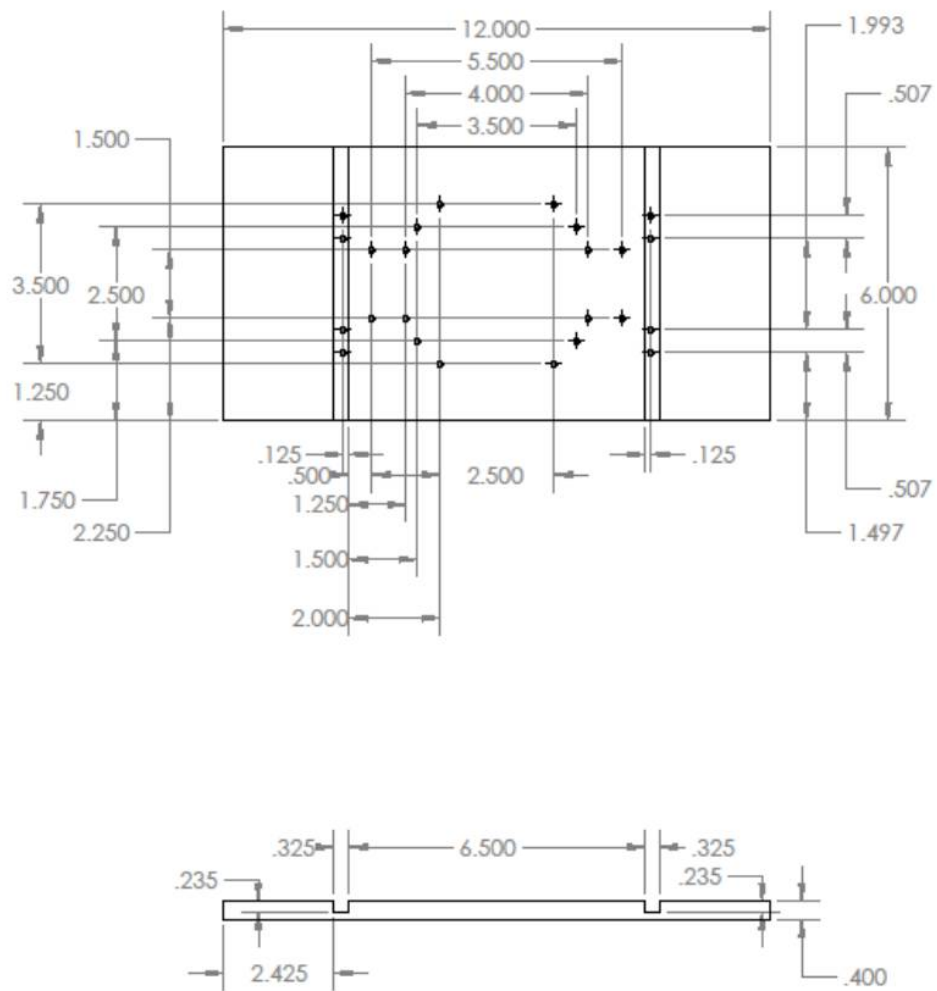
Schematic for HPUAM base plate. Dimensions in inches, holes are all threaded for 8-32 bolts.
